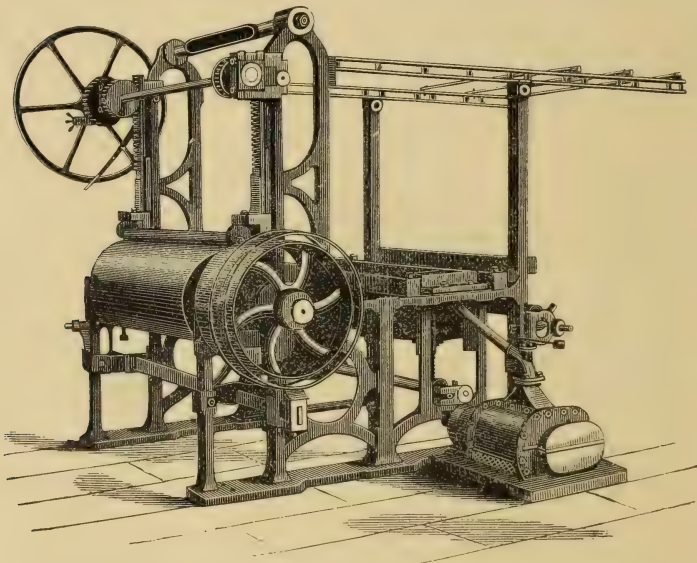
Bentley & Jackson's Damping machine with double injector.
